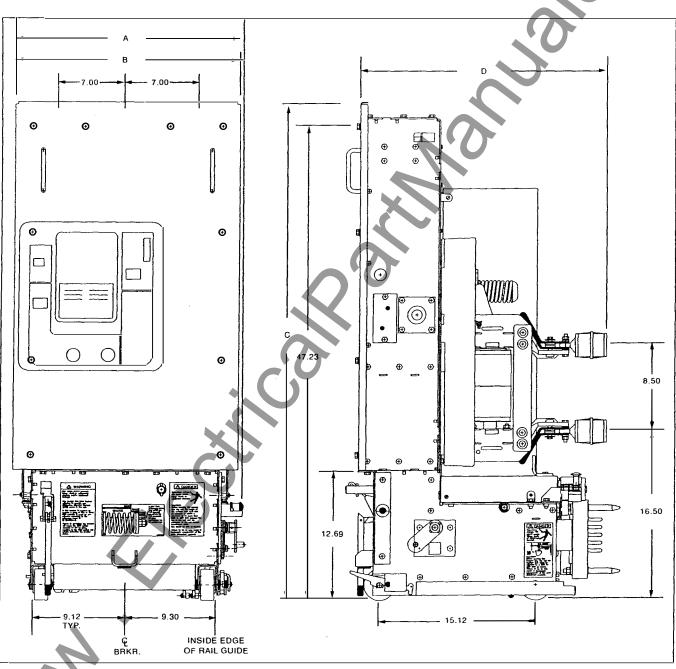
Outline and Dimensions (inches) Type DHP-VR Breakers (5 kV, 250 MVA Rating)
